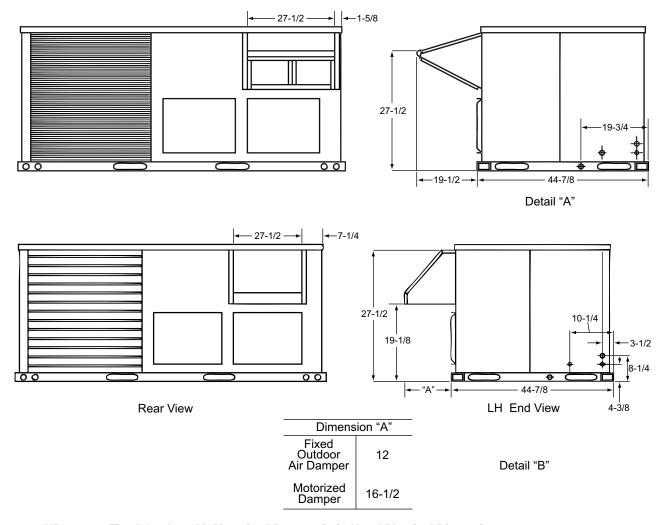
XP036-060 Fixed Outdoor Air Motorized Damper Rain Hood Physical Dimensions
